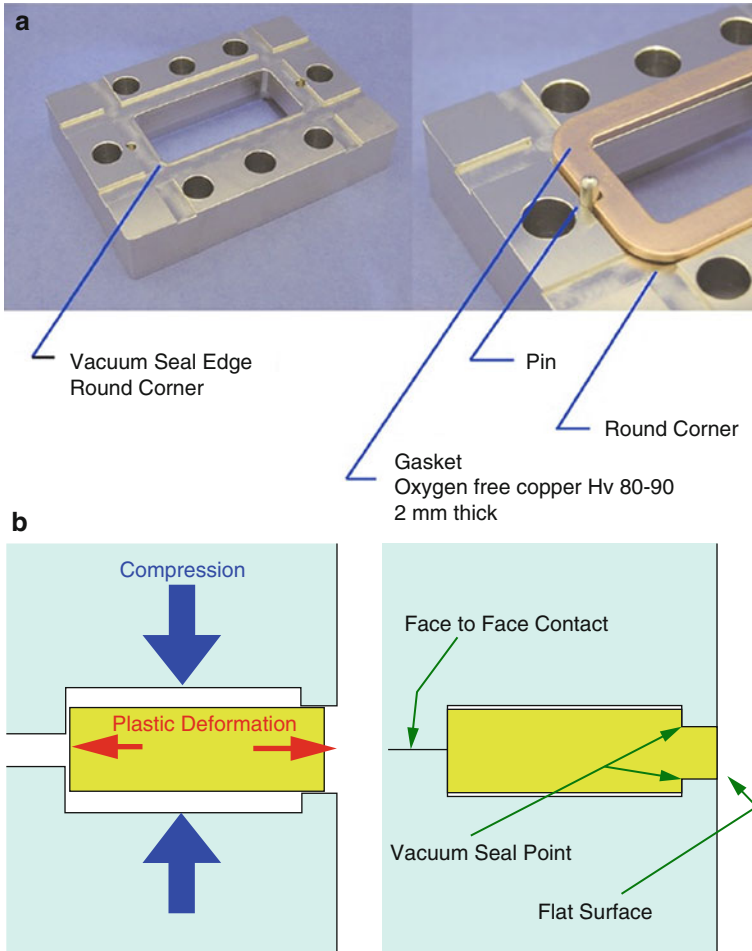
ADESY-type flange. (a) Flange and gasket. (b) How gasket works
